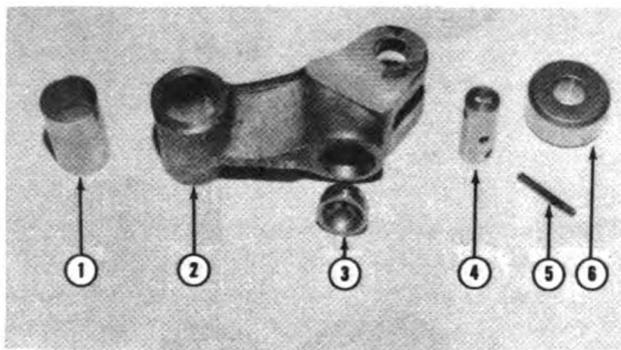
(N10402). Measure The Cam Follower Bushing.
